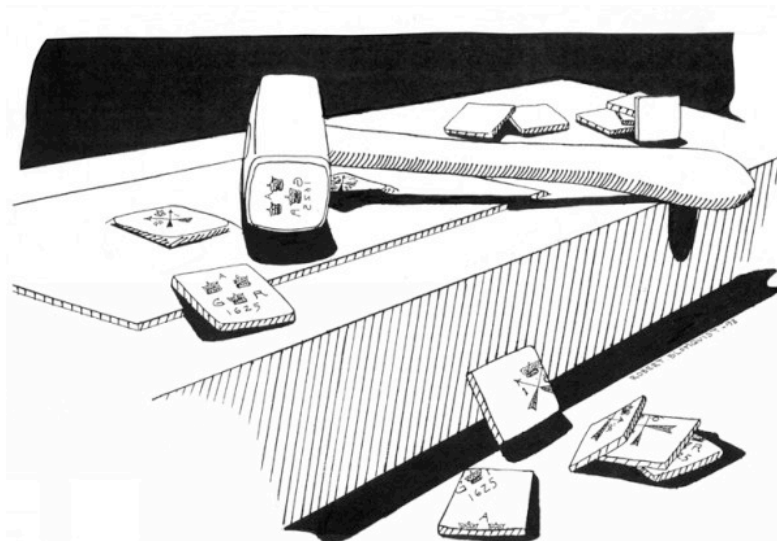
Equipment for hammer embossing, Courtesy of Vasamuseet.
